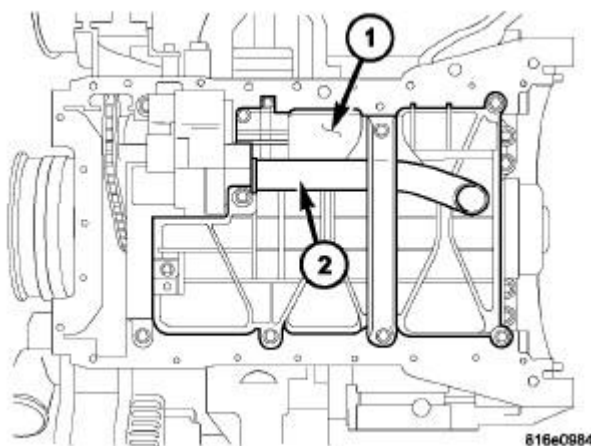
OIL PUMP COVER REMOVAL/INSTALLATION
